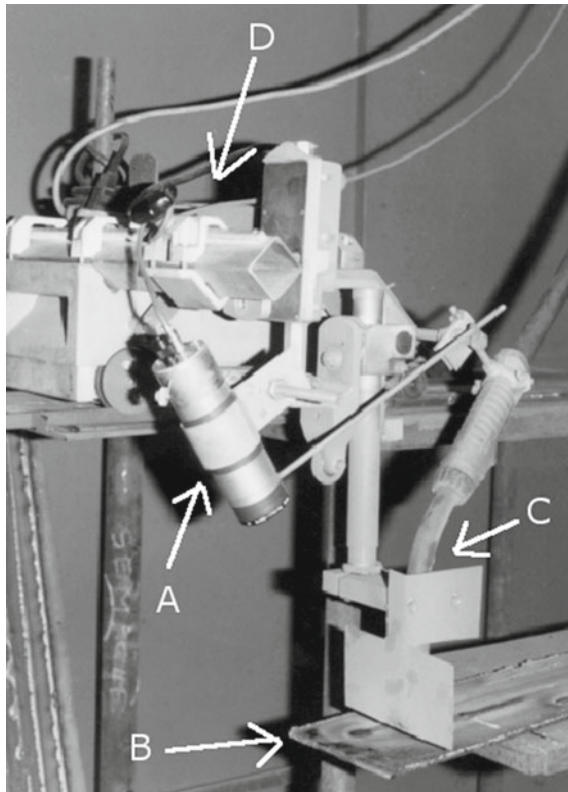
A photograph of the welding machine setup. a Optical pyrometer, protected from direct radiation by a screen; b Plate to weld; c The torch, inside which passes an electrode; d The cart that makes the torch move
